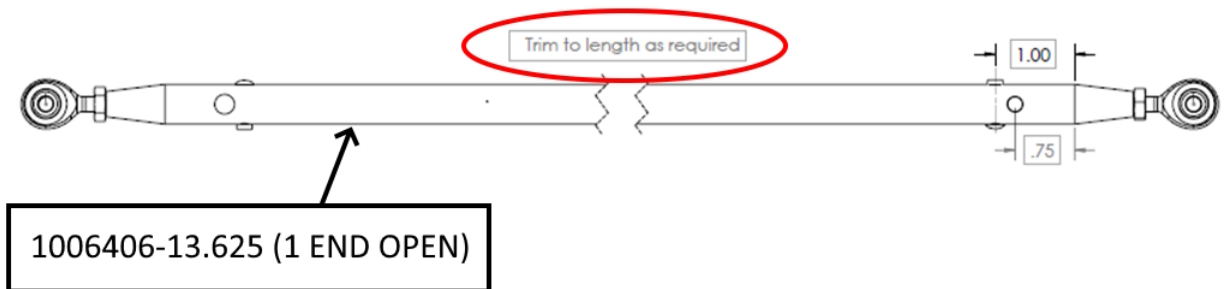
PUSH PULL TUBE MODIFICATION
